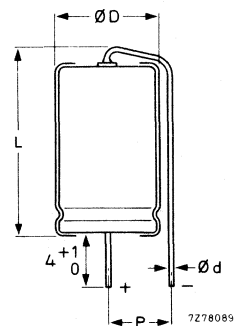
Style 3 see Table 5 for dimensions ϕd , ϕD , L and P.
